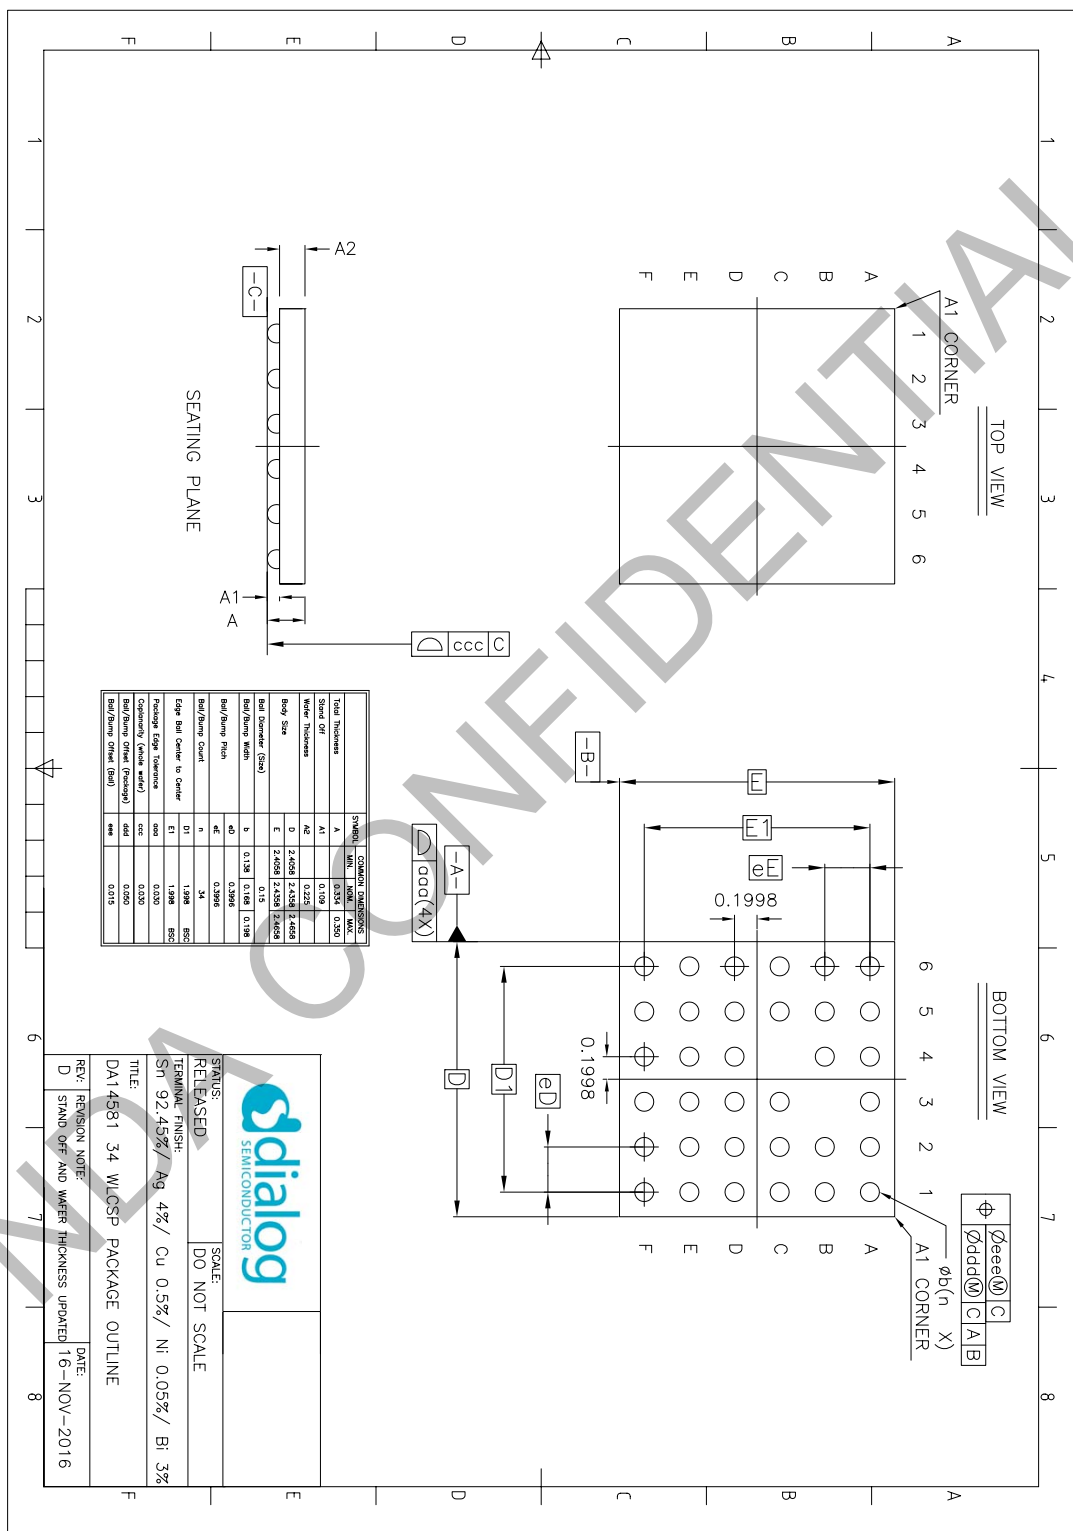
Ultra-Thin WLCSP34 Package Outline Drawing
